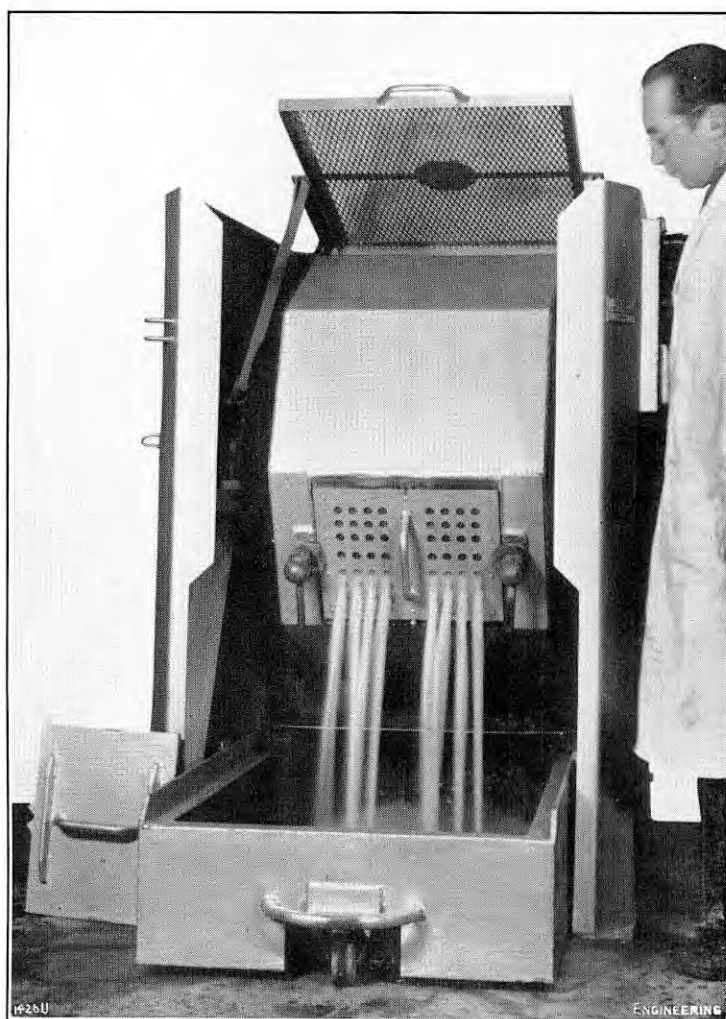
"ROTO-FINISH" MACHINE; ROTO-FINISH, LTD.
